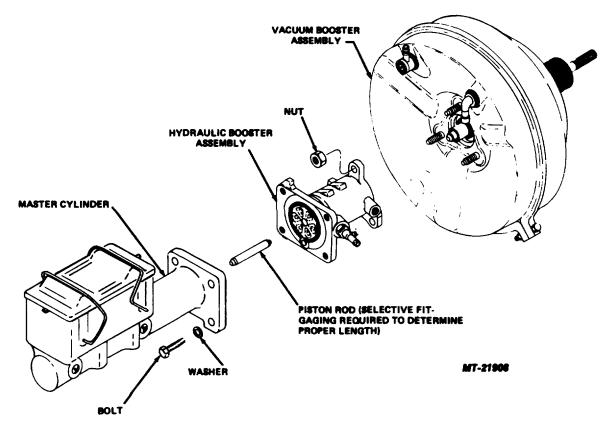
Dual Power Brake Booster With Master Cylinder.
